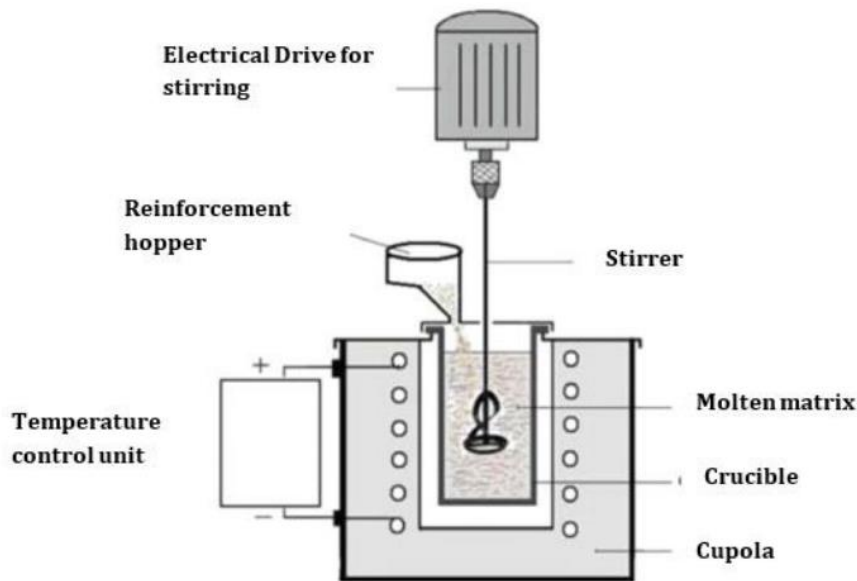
Stir Casting Equipment (Gururaj et al. 2021)
